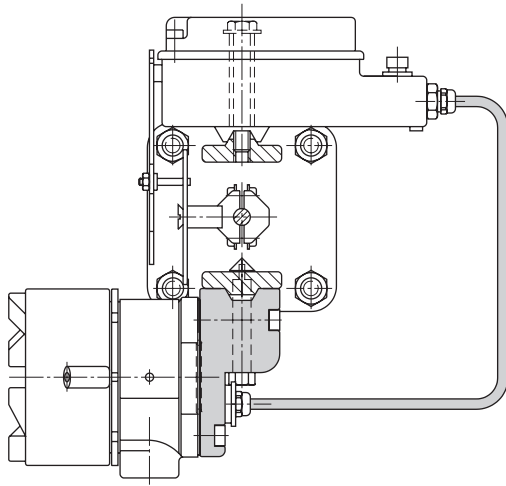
NAMUR attachment to valve with Type 4765 Positioner
